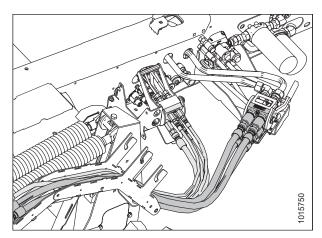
Hydraulic Multicouplers and Hose Routing
